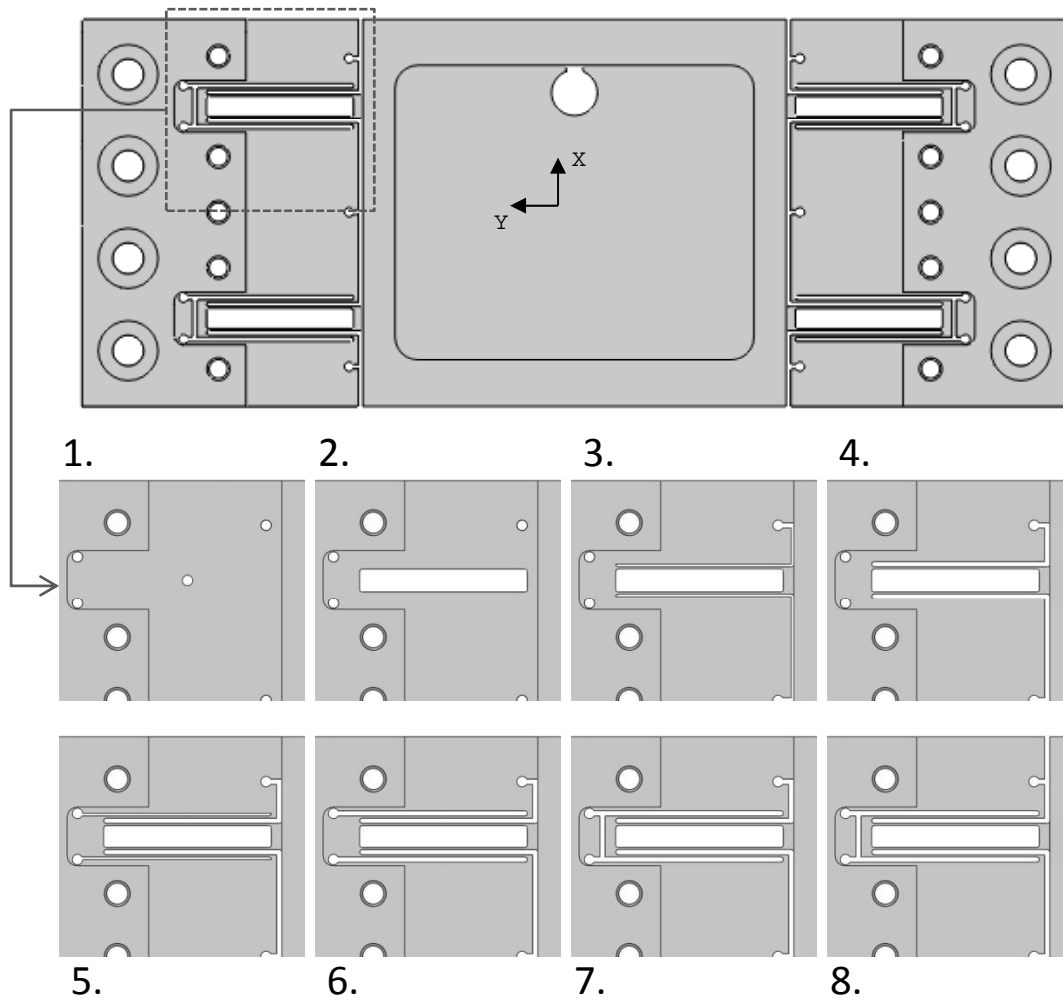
Top-view of the coarse flexural stage (top) showing the flexure design. The steps for the EDM manufacturing process are shown for one flexure leg.
